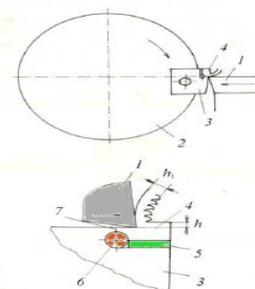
Principle of the method for immediate interruption of the contact of the tool and workpiece (a)[9], 1- cutting wedge, 2 - disc, 3 – tested material sample, 4 – torn out sample part, 5 – support plate for sample slip, 6 – metal bar, 7 – sample herniation place
